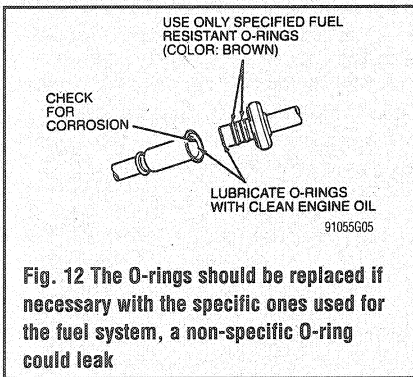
The O-rings should be replaced if necessary with the specific ones used for the fuel system, a non-specific O-ring could leak
